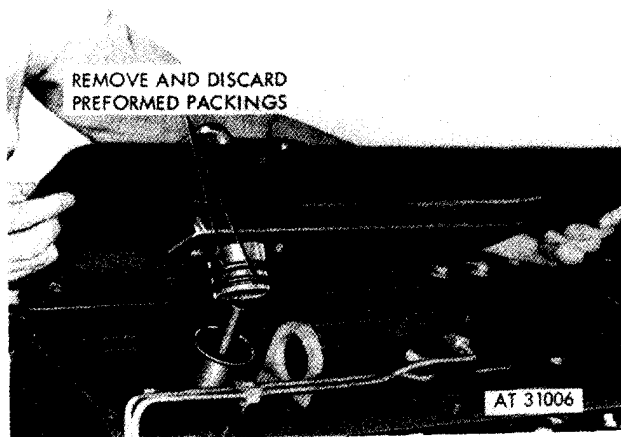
Removing or installing oil level indicator upper cover plate—relocated oil filler tube installation.
